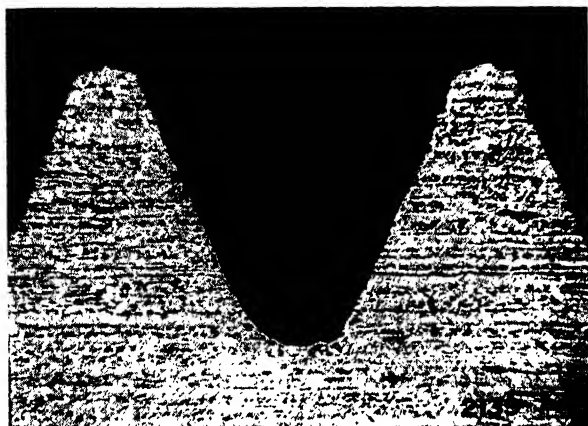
MACHINED THREAD IN A FREE-CUTTING STEEL.  $\times 50$
